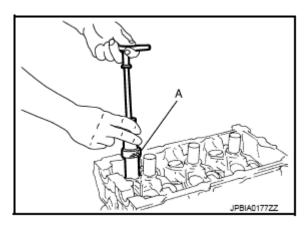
Removing Valve Oil Seal Using Valve Oil Seal Puller Courtesy of NISSAN NORTH AMERICA, INC.
